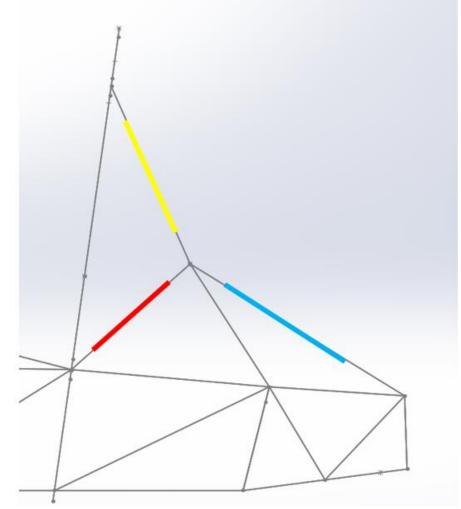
side view showing Main Hoop Brace (yellow), Rule F.11.L Protection member
